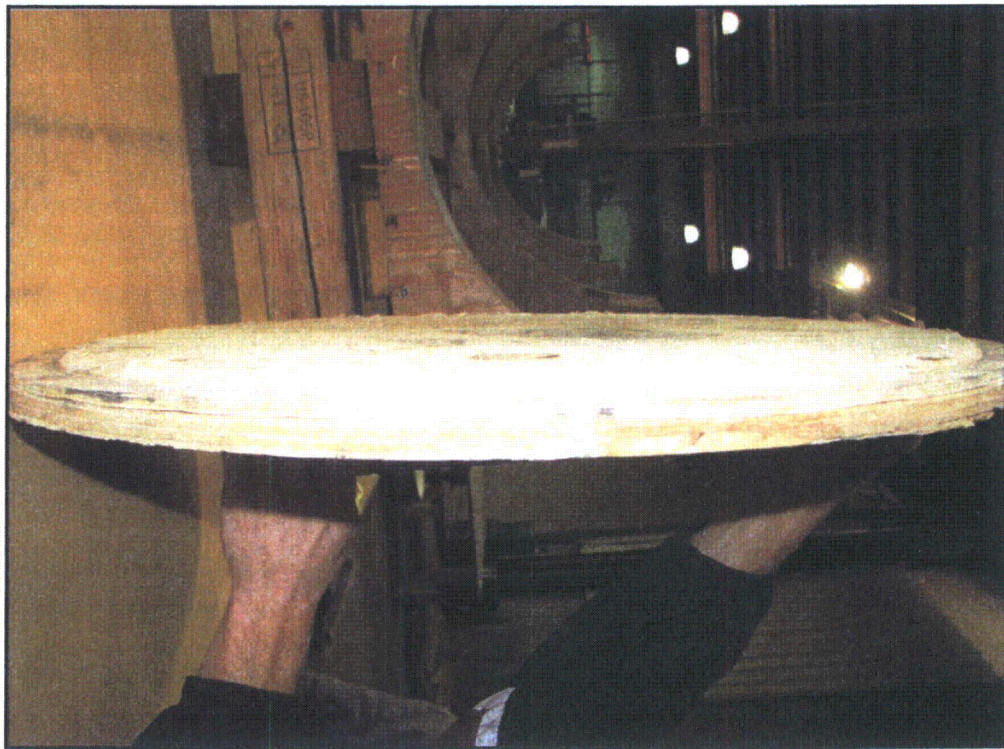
Deformation of NS30 #1 Plywood Spacer (canister lid interface side)
